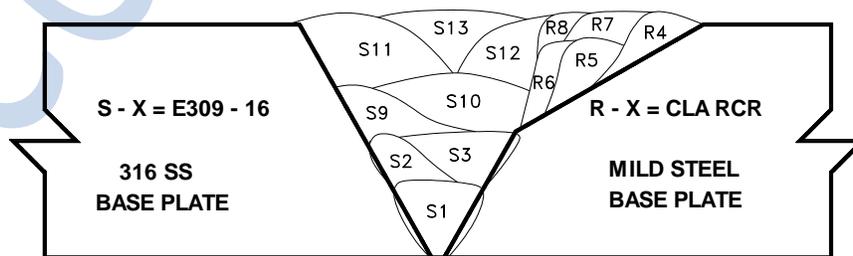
Bead Sequence for Weld Procedure Test
